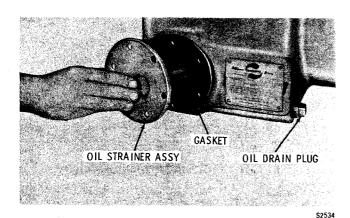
Removing oil strainer and gasket (-1 models)
